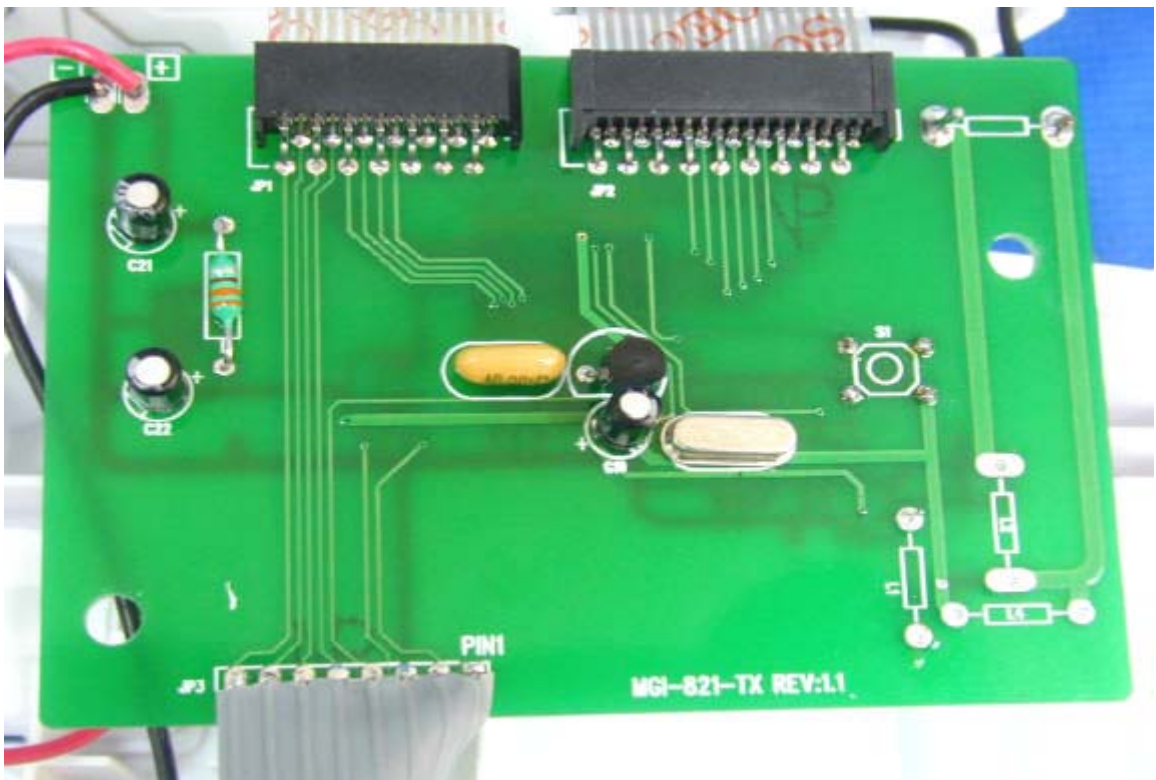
EUT (TX) SOLDERING SIDE VIEW
